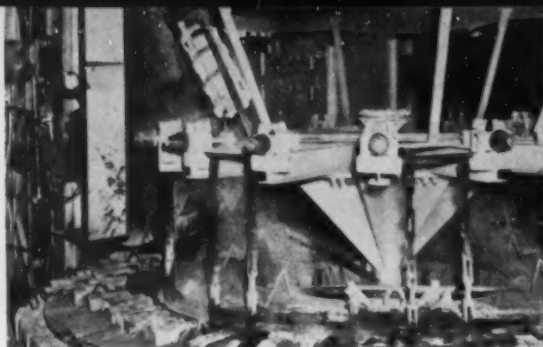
Drum with hook drops billet (in basket) into rotary salt bath. Drum indexes carousel, picks up heated billets.
